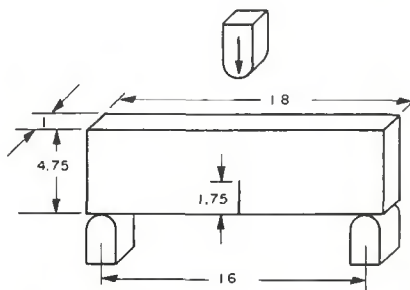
Standard 1 in. DT specimen featuring a 1.75 in. deep electron beam brittle weld crack starter
